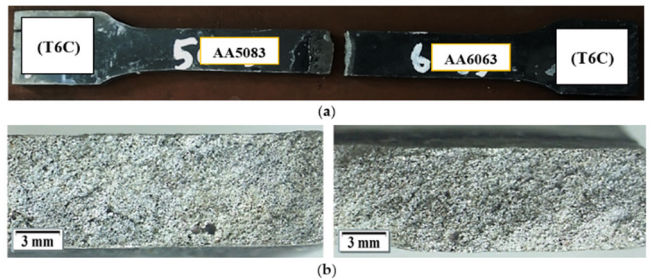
a) Fractured specimen T6C; b) Macrostructure of the fracture surface of T6C
